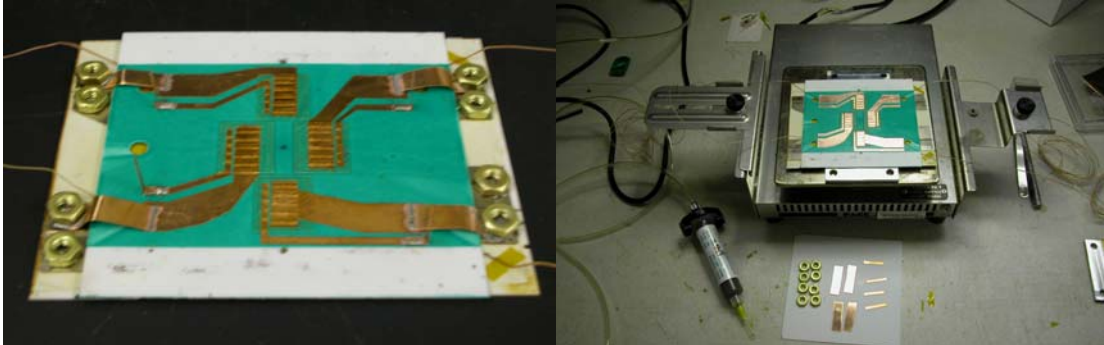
Attachment of electrical connectors via solder paste and hot plate
